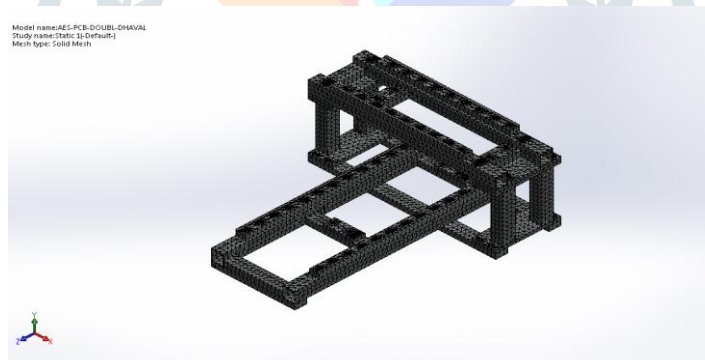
Meshing of PCB Drill Mech SS 300 Structure using static analysis
